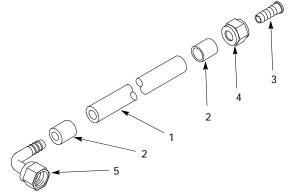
SURGE TANK TUBE ASSEMBLY
